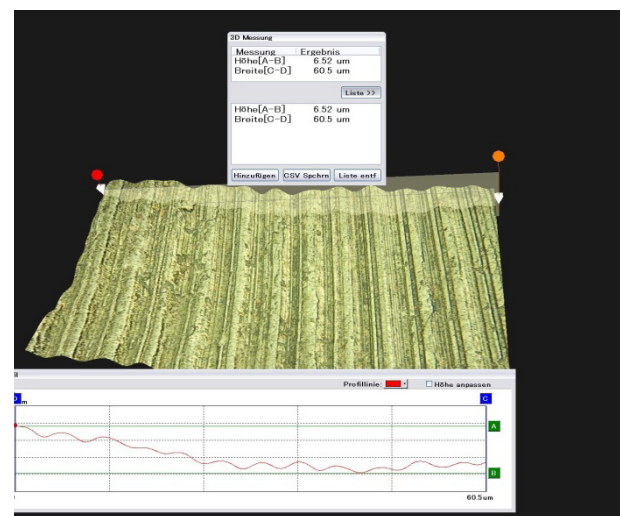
3-D observation of a machined workpiece surface using a digital microscope [1]
